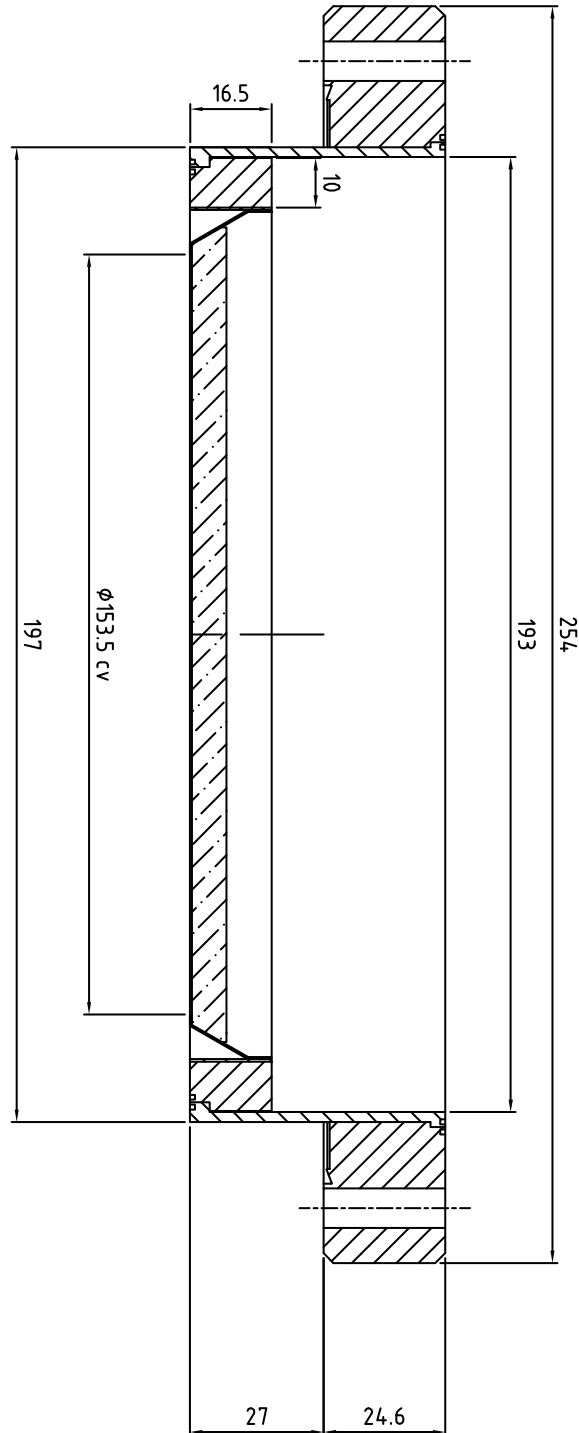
Technical drawing of the inverted CF200 viewport located at the main chamber. Dimensions are given in millimeter. Figure reprinted with permission from UKAEA, United Kingdom.
